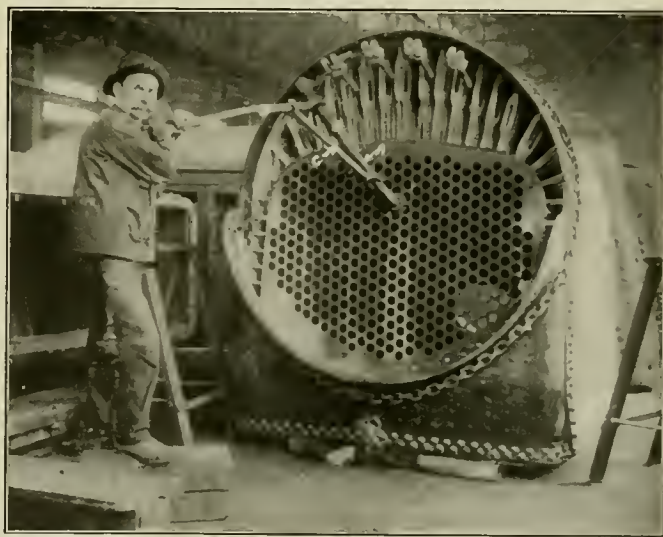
Holder-On for Riveting the Boiler Barrel to the Wrapper Sheet
